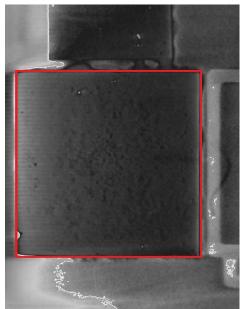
3D CT-scan of the control IGBT, showing the solder layer between the chip and the DCB.
